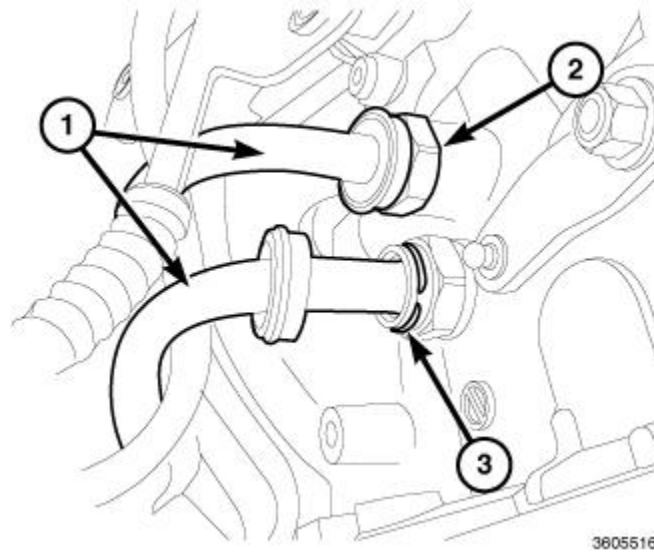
Transmission Fluid Cooler Lines, Clips & Fittings
